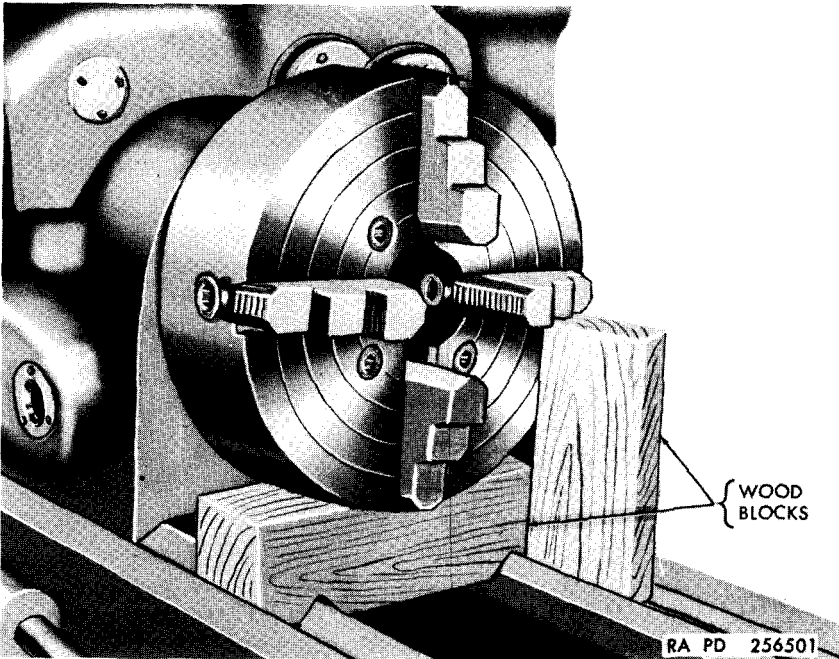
Removing chuck from lathe spindle by means of a wood block.
